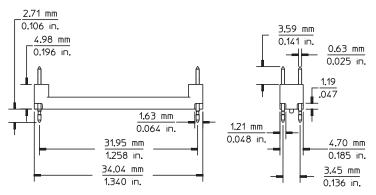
Pro Series soft touch retention module dimensions, part number E5403A
